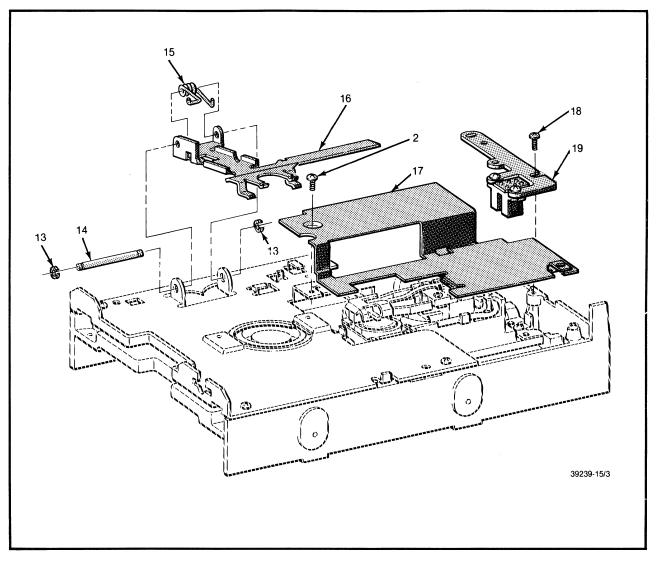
455/465 BASIC DRIVE ASSEMBLY (SHEET 3 OF 4)
